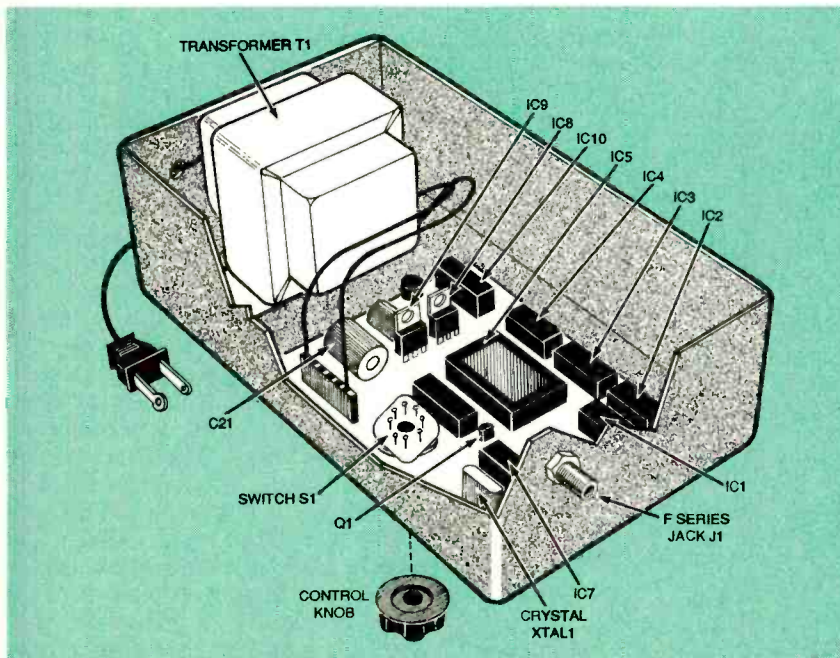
ASSEMBLY DIAGRAM of the completed Video Pattern Generator. The power supply is located within the project case. The switch knob is attached to the PC board-mounted switch on the bottom of the case.
